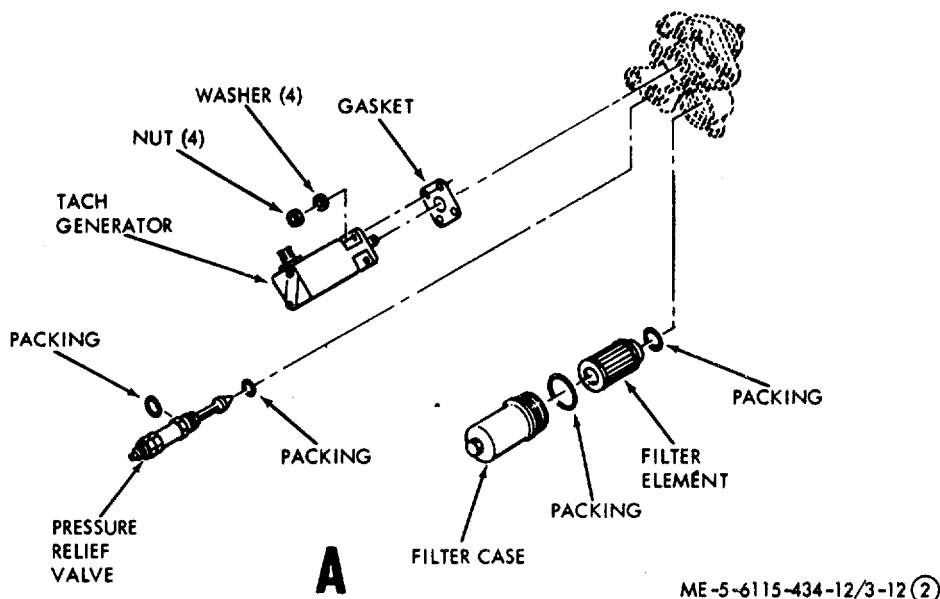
Lubrication system component replacement (Sheet 2 of 2).
